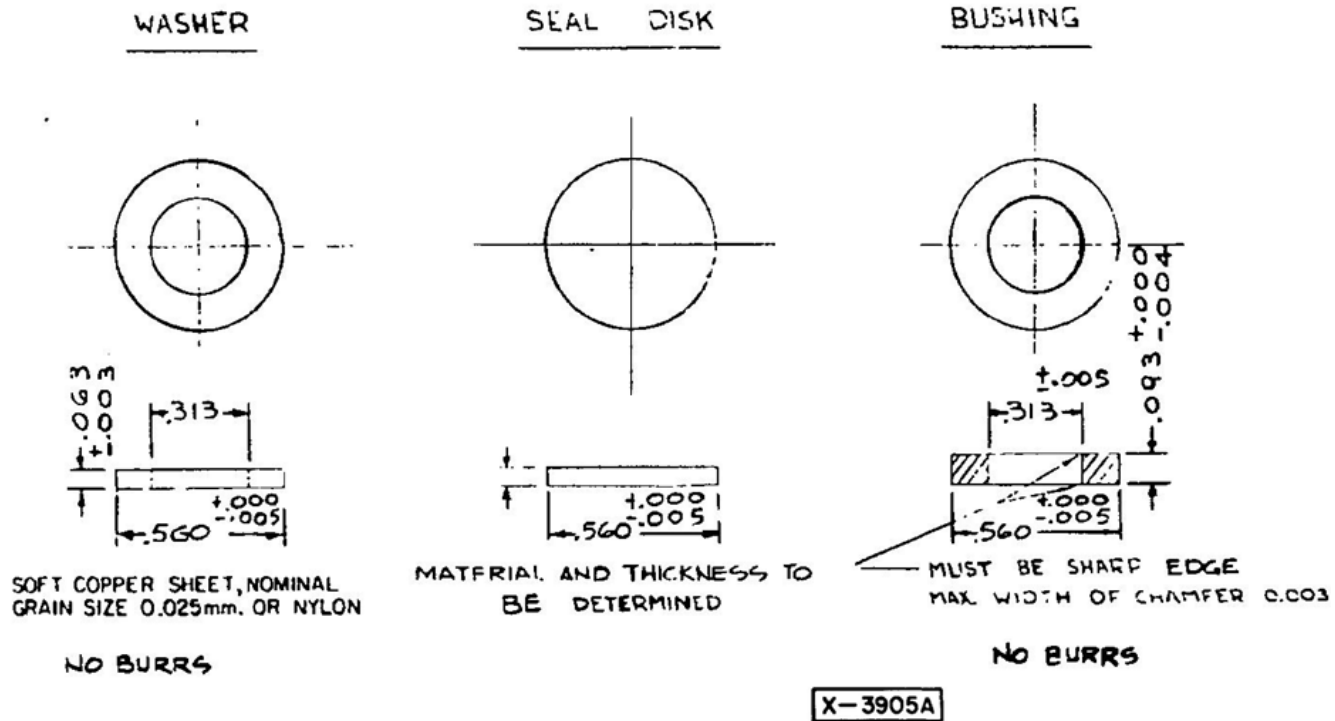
Cylinder seal details – washer, seal disk, and bushing
